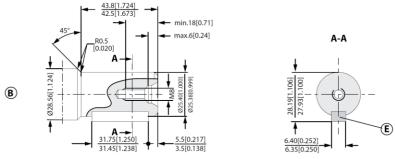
OMR shaft version: Cylindrical shaft 25 mm
